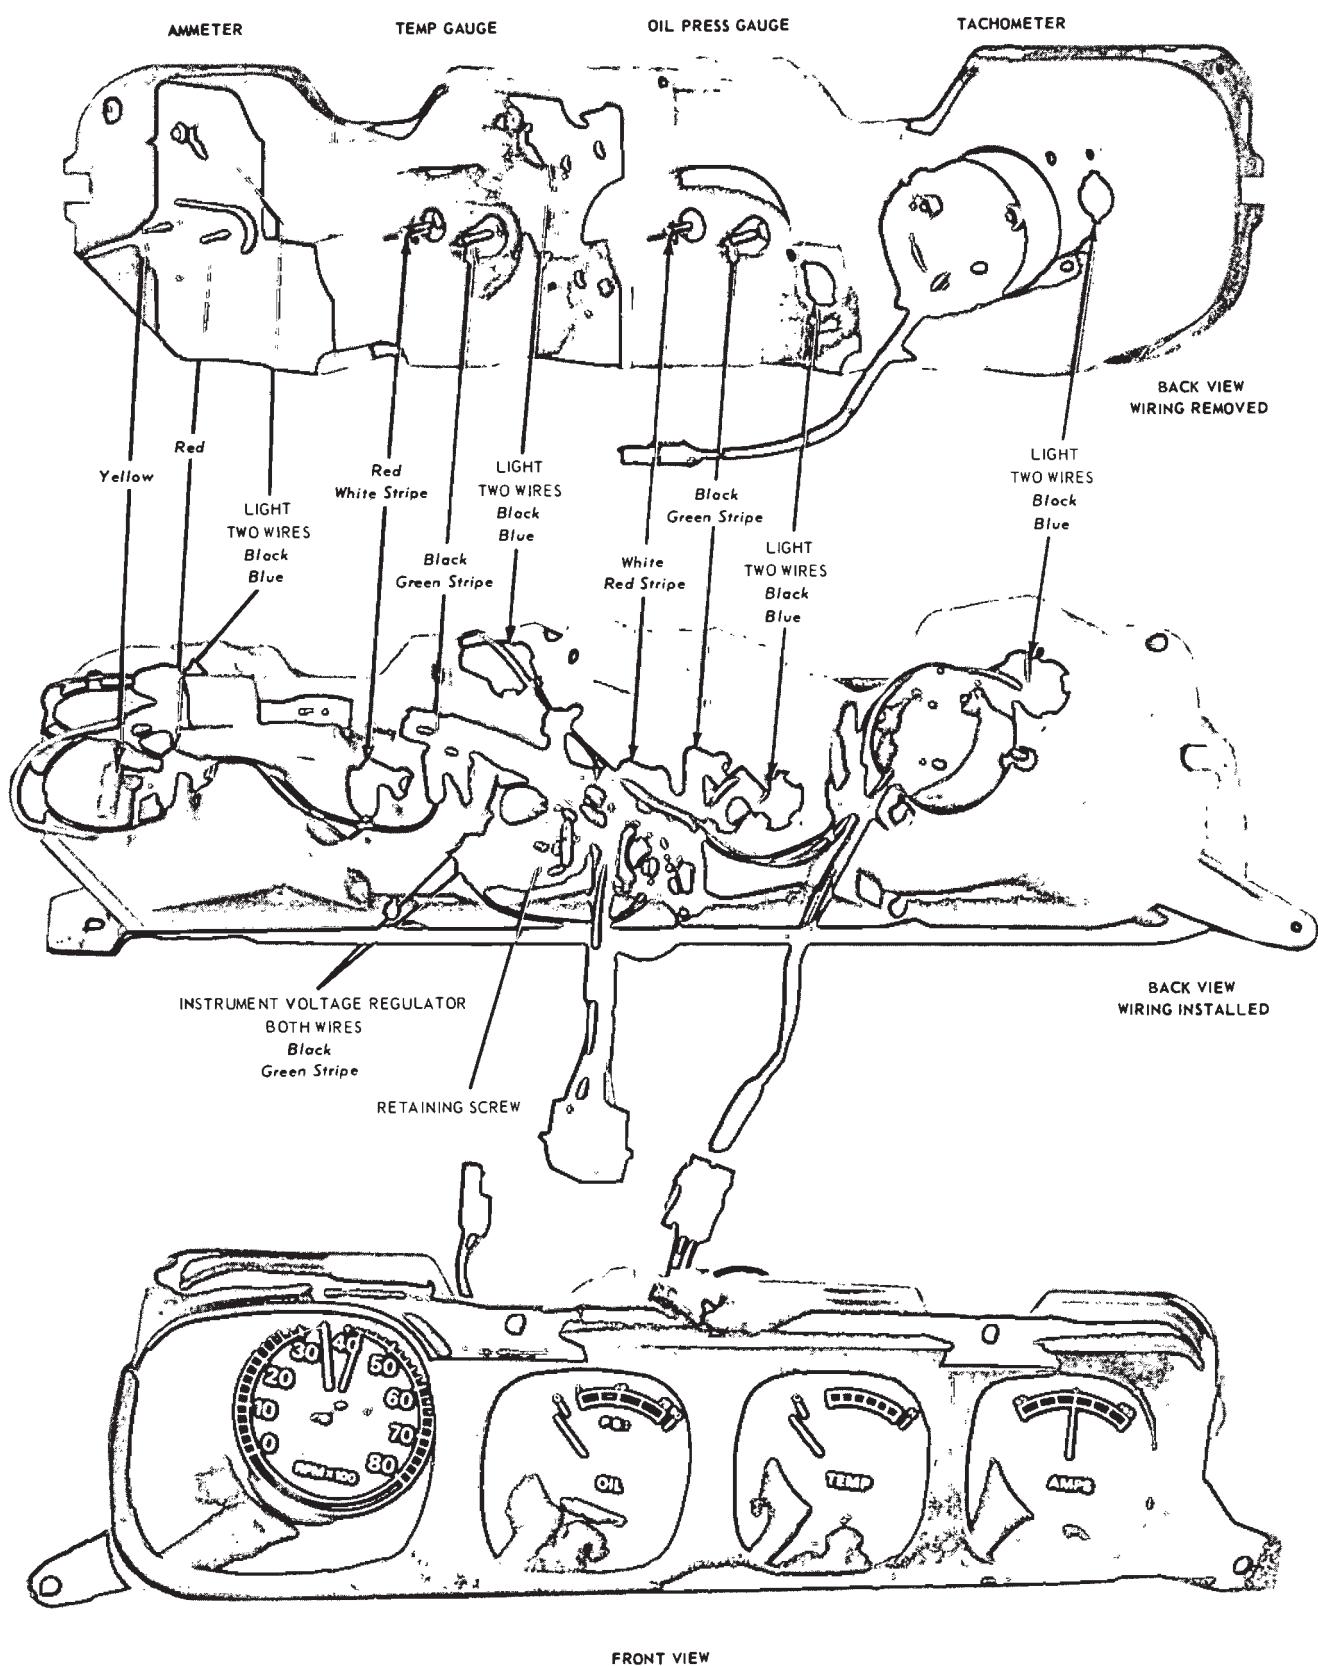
Montego Auxiliary Instrument Cluster—Cyclone Spoiler Models
